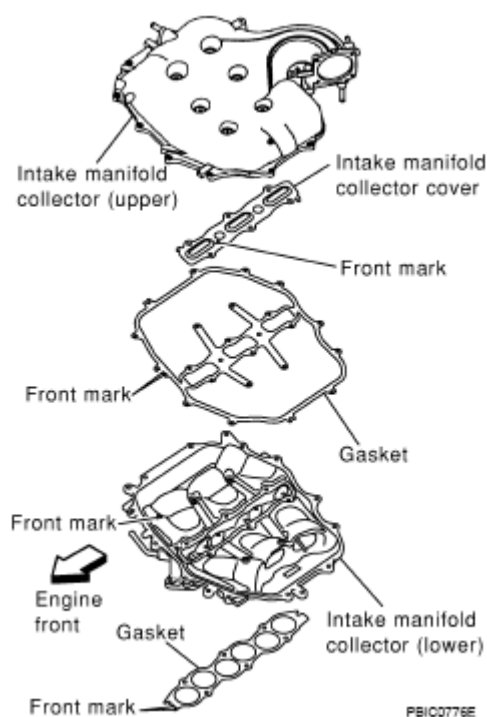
Identifying Intake Manifold Collector Part Installation Direction
